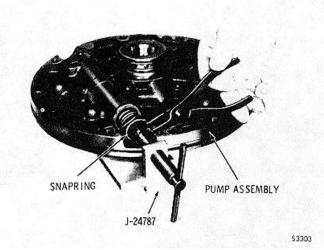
Removing (or installing) main-pressure regulator valve
